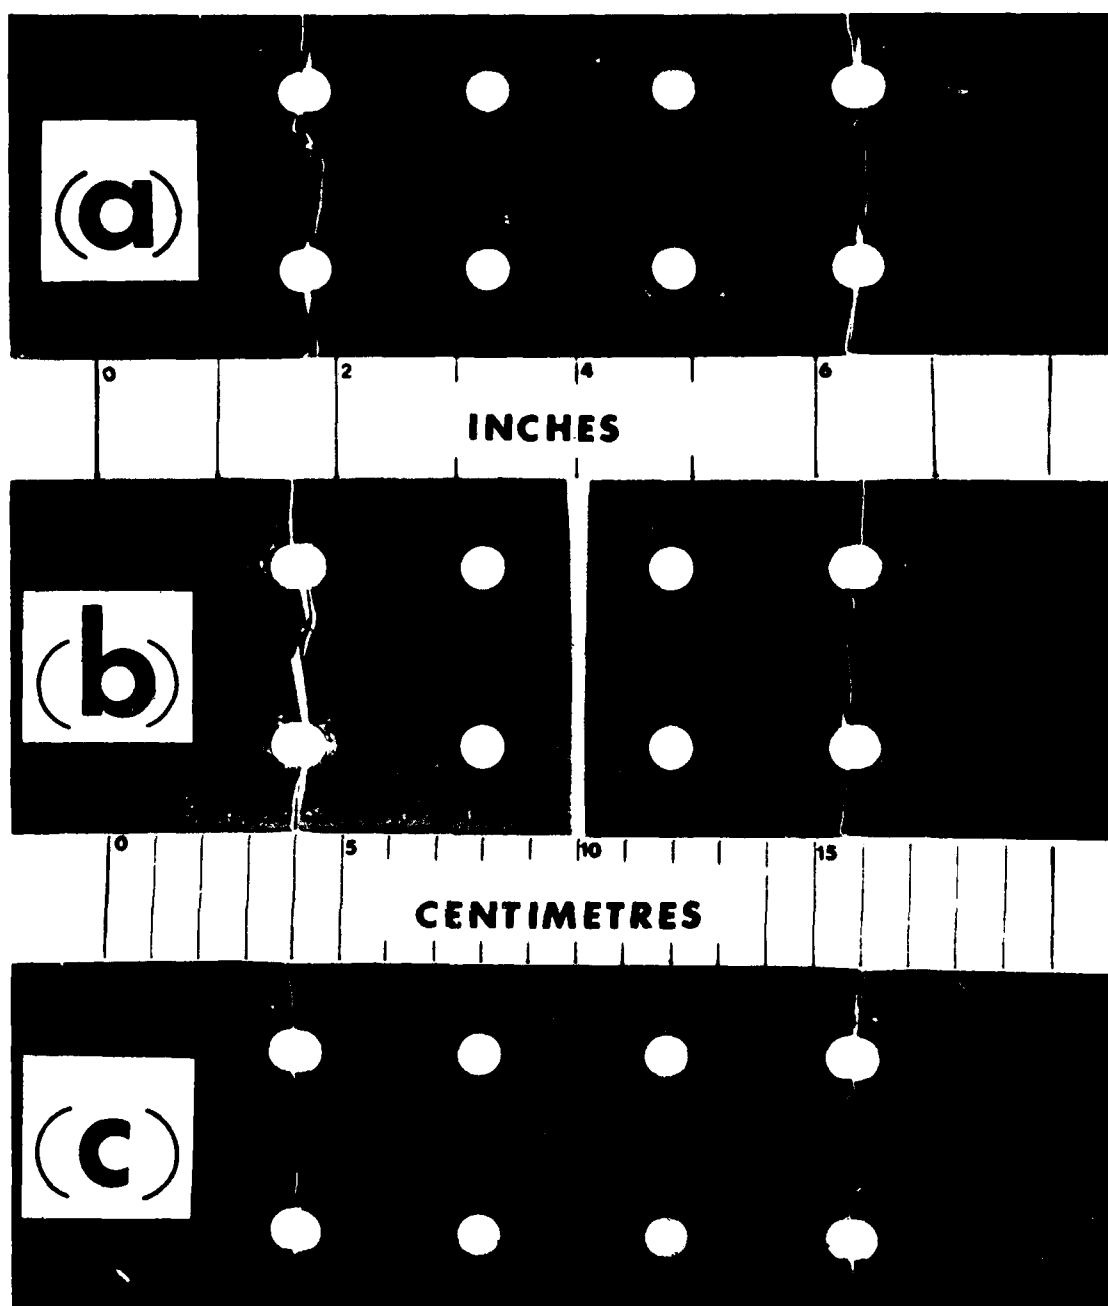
FRACTURES IN LOOSE SPECIMENS
